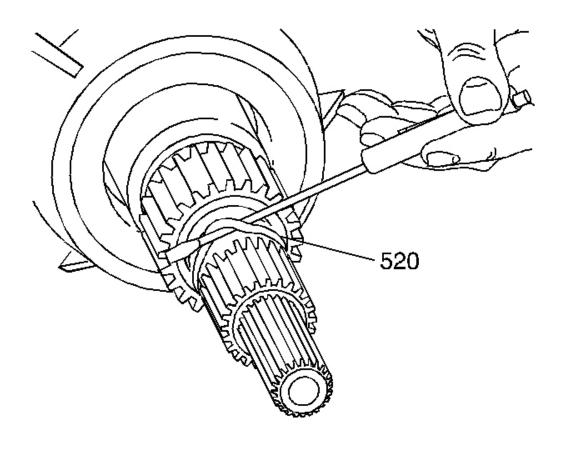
Identifying Turbine Shaft O-Ring Seal Courtesy of GENERAL MOTORS CORP.
